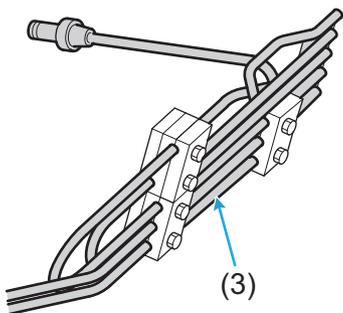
High Pressure Fuel Injection Pipe - Check
